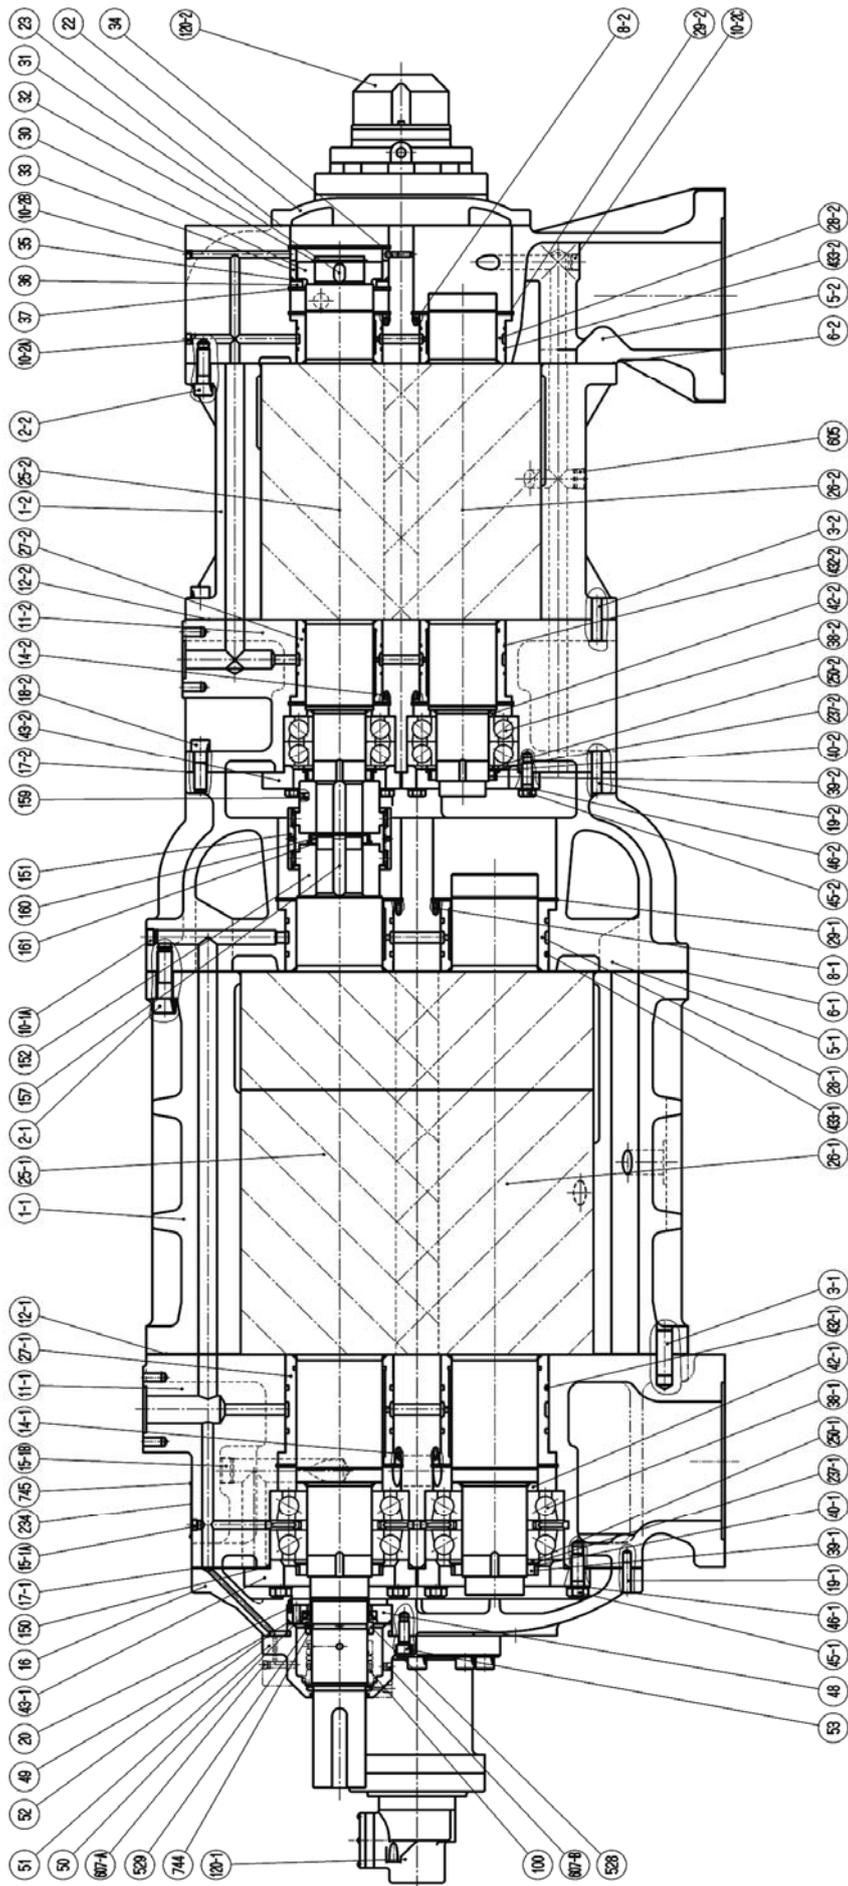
3225LLC Assembly Sectional View (Horizontal)
